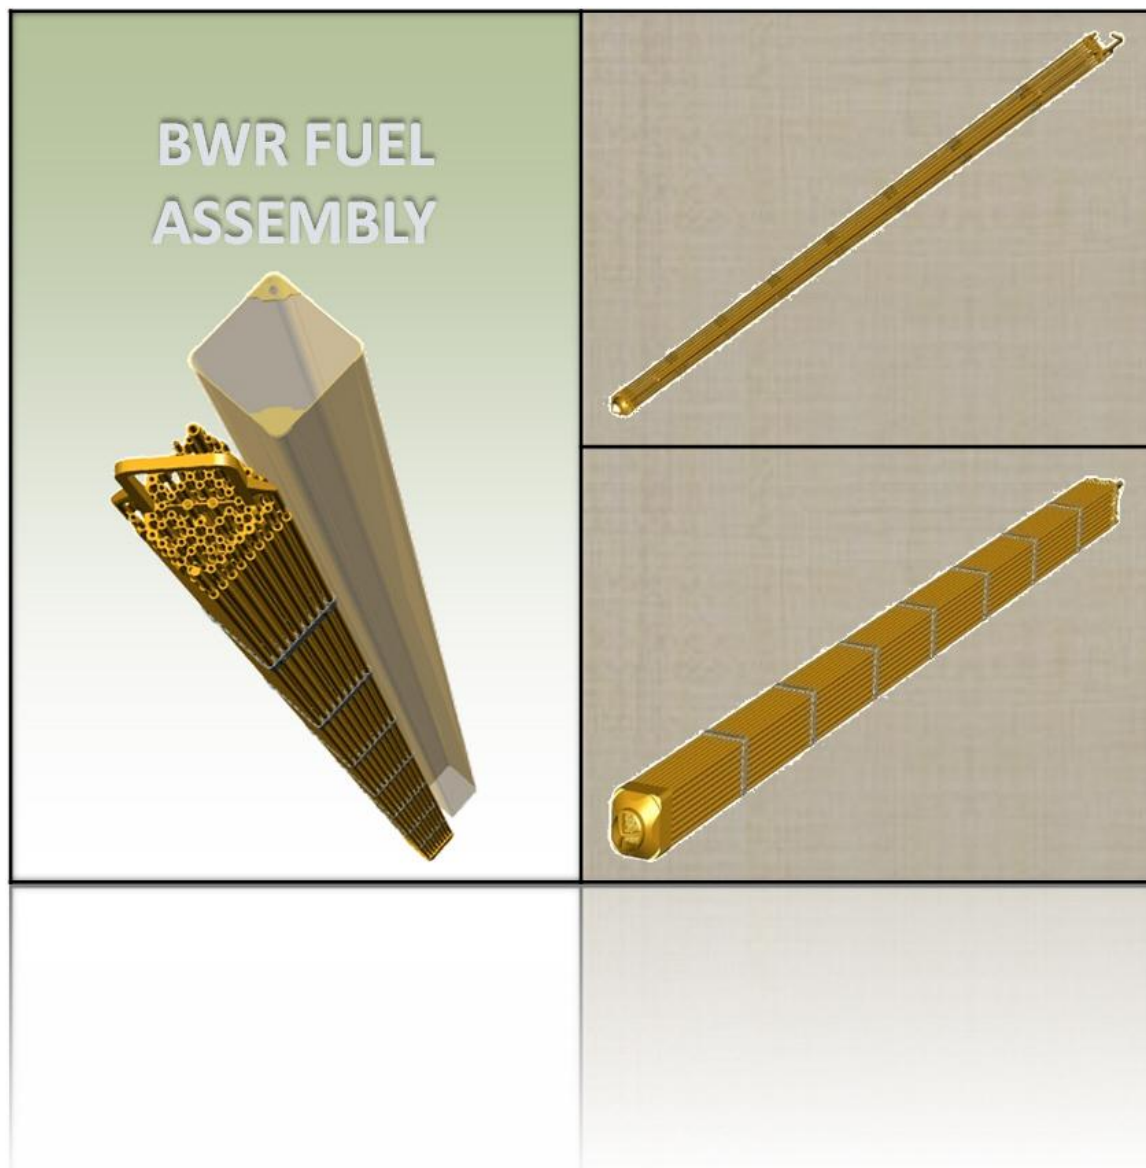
CAD solid model of complete BWR fuel assembly.
